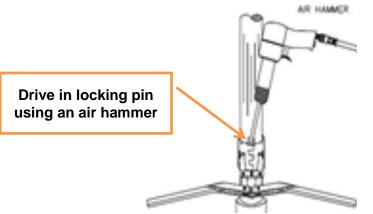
Use a pneumatic air hammer to drive locking pin in place.
